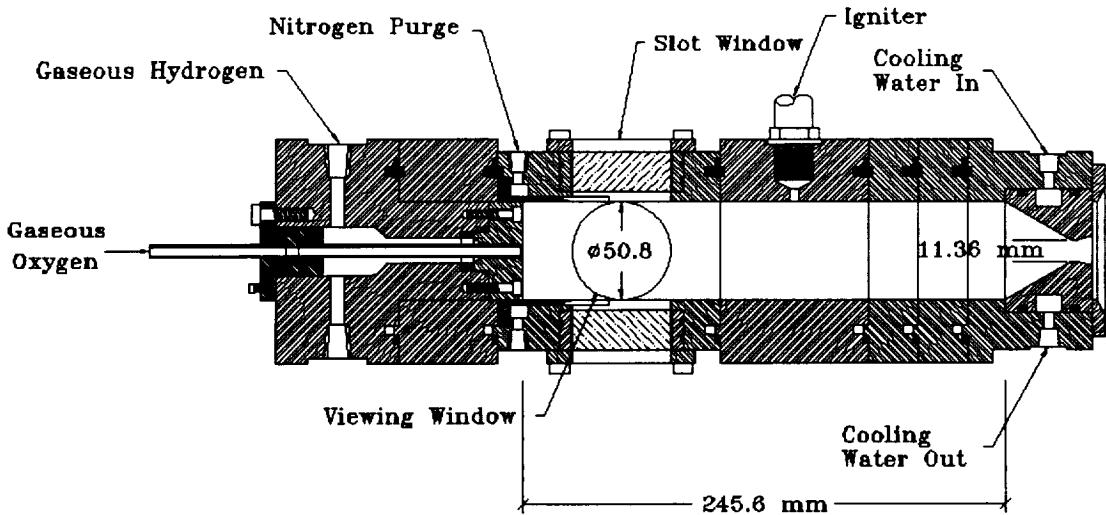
Cross-sectional view of the optically accessible rocket chamber. The chamber is modular in design and allows for varying the chamber length, injector assembly, window-section location and nozzle assembly. The interior of the chamber is 50.8 x 50.8 mm. For the results presented here, a shear coaxial injector was used. The  $\text{GO}_2$  post has an inner diameter of 7.75 mm (0.305 in.) and is not recessed with respect to the injector face. The fuel annulus has an inner diameter of 9.53 mm (0.375 in.) and an outer diameter of 12.7 mm (0.5 in.). The chamber length and nozzle throat diameter are 245.6 mm and 11.36 mm, respectively.
